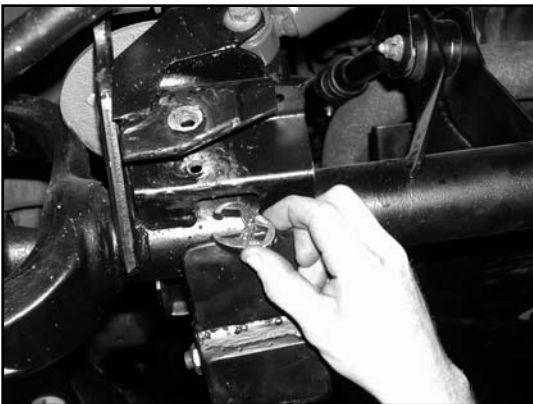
INSERT CROWFOOT WRENCH INTO OPENING TO TIGHTEN NUT
